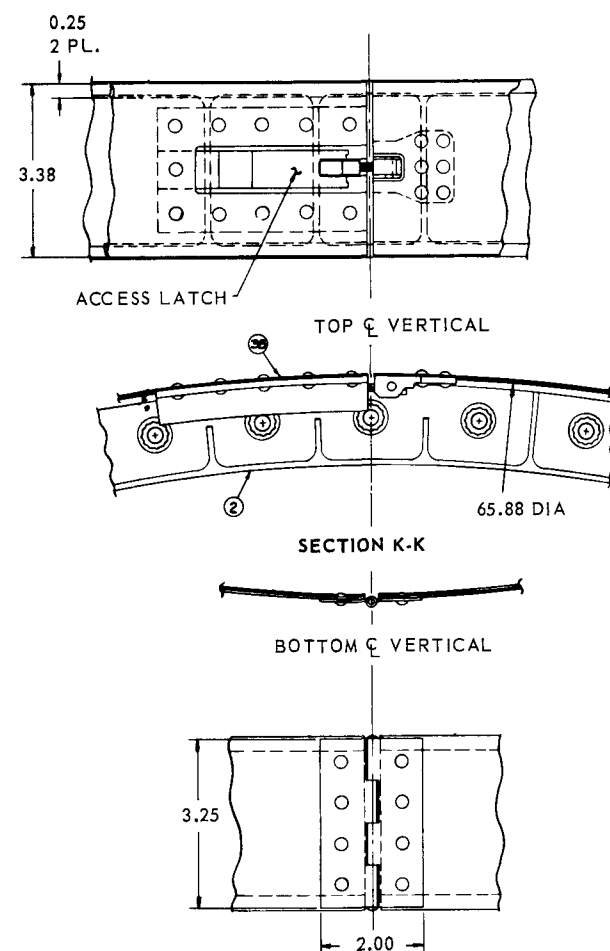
View of rear shield outer section (Dwg. DI449)
